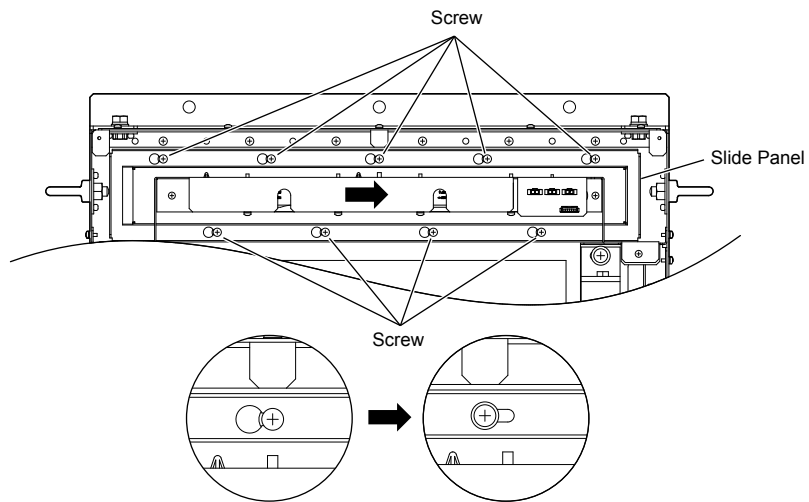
Remove the Fan Unit: 4A0515 and 4A0675
